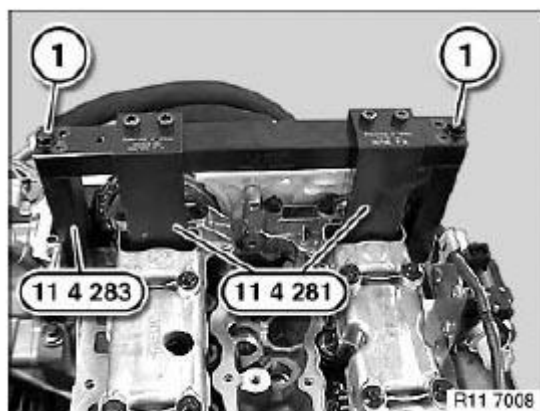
Identifying Special Tools (11 4 281) And (11 4 283)
